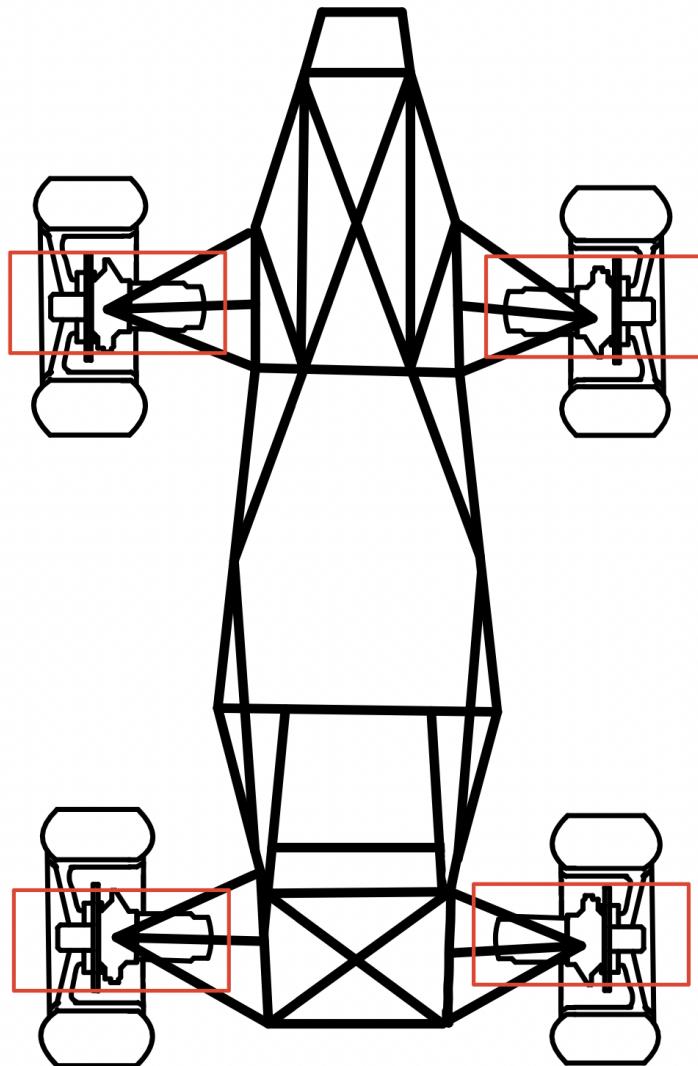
Locations of the Four In-Wheel Motors [8]
